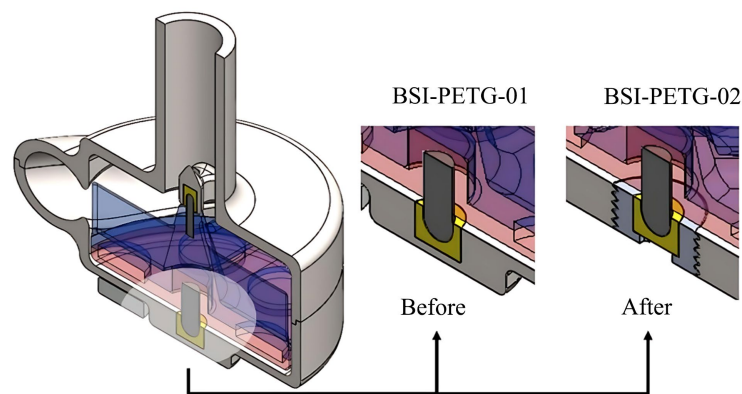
Improved housing cradle design from fixed to threadable. Source. Author.
